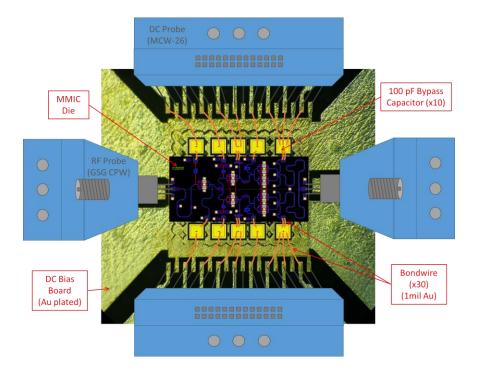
Diagram of PA assembly and die probing for MMIC measurements
